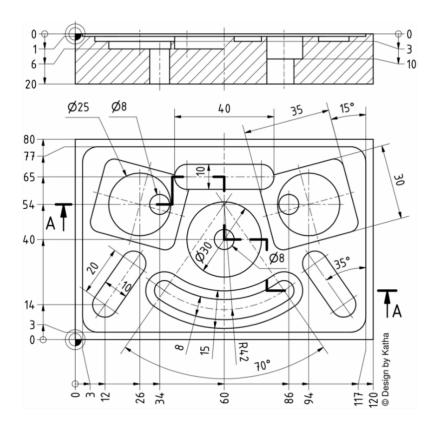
CNC machining use case - Technical drawing of the workpiece⁴
